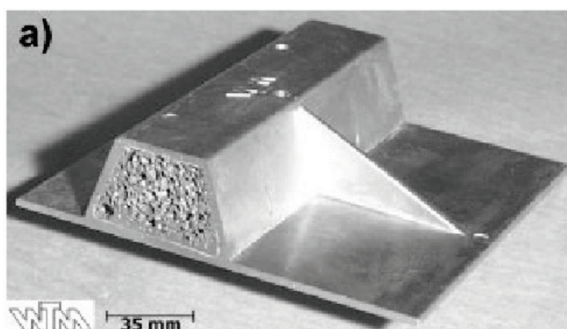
Test sample with aluminium foam core produced by die casting [9]
